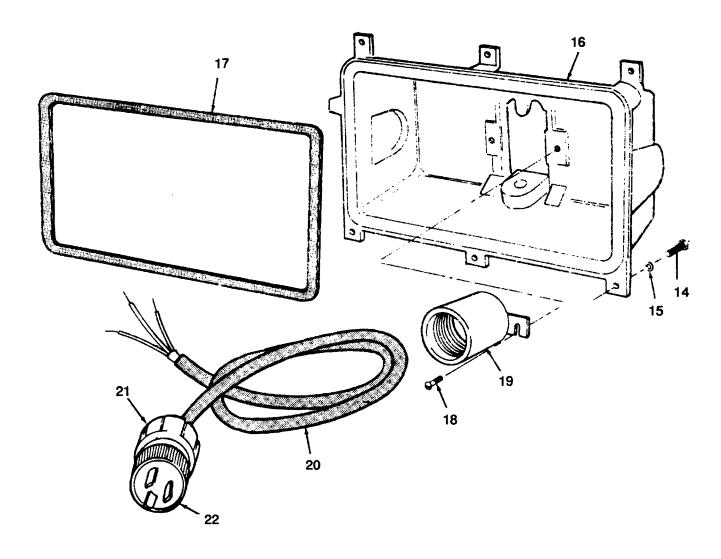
Fixture Assembly (Sheet 2 of 3).
